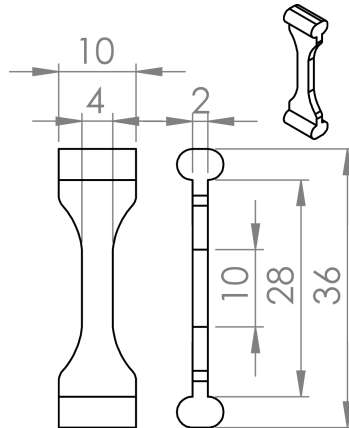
Dimensions (in mm) of the dumbbell specimens.
